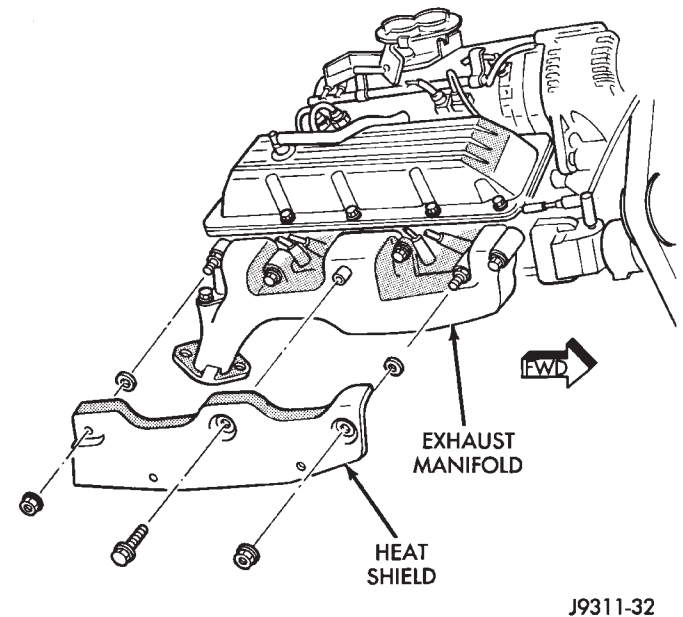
Exhaust Manifold Heat Shields (Left Shield Shown)
